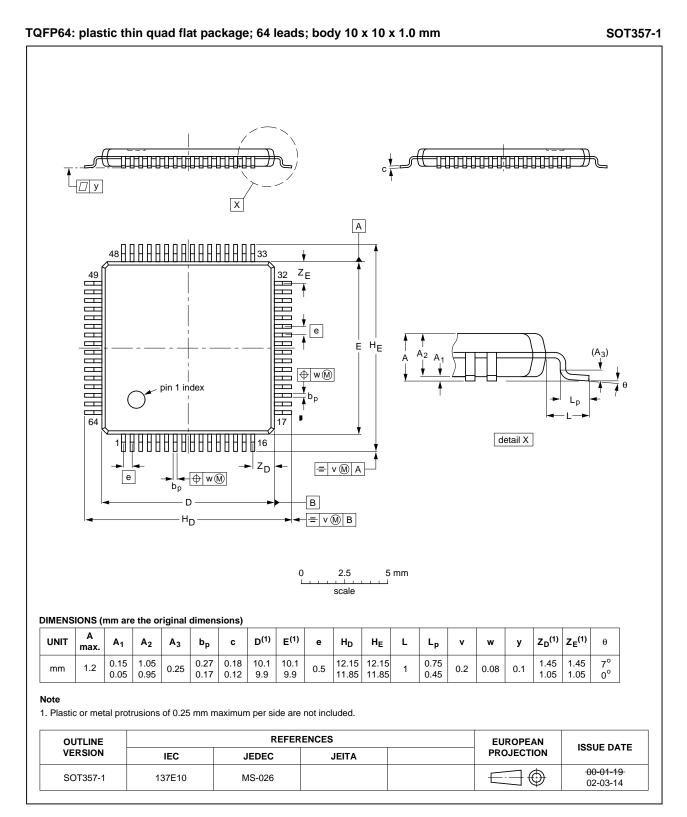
Package outline SOT357-1 (TQFP64) of PCF85176H
